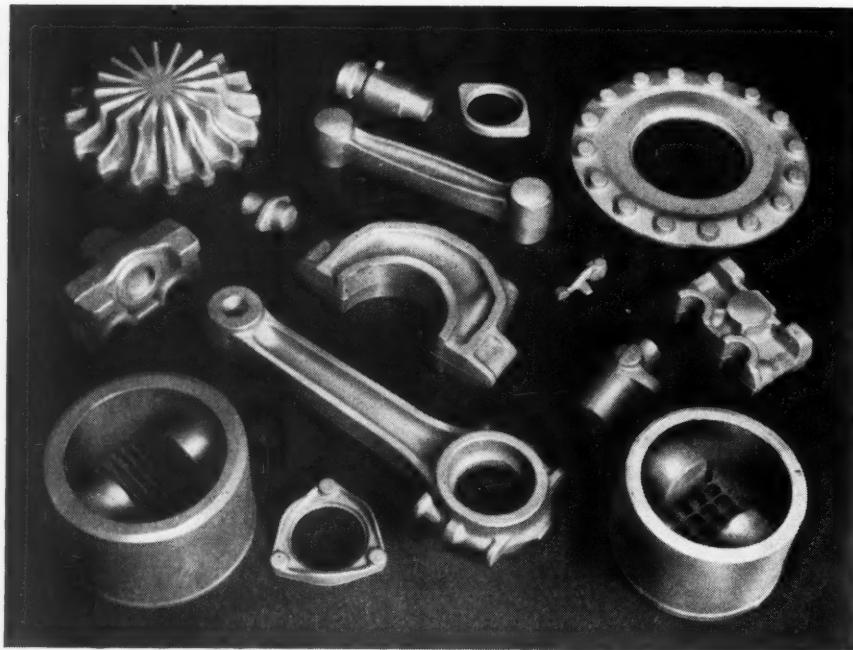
Typical aircraft engine parts forged from high-strength aluminum alloys, including an impeller, bearing caps, pistons, a connecting-rod, and several flanges
